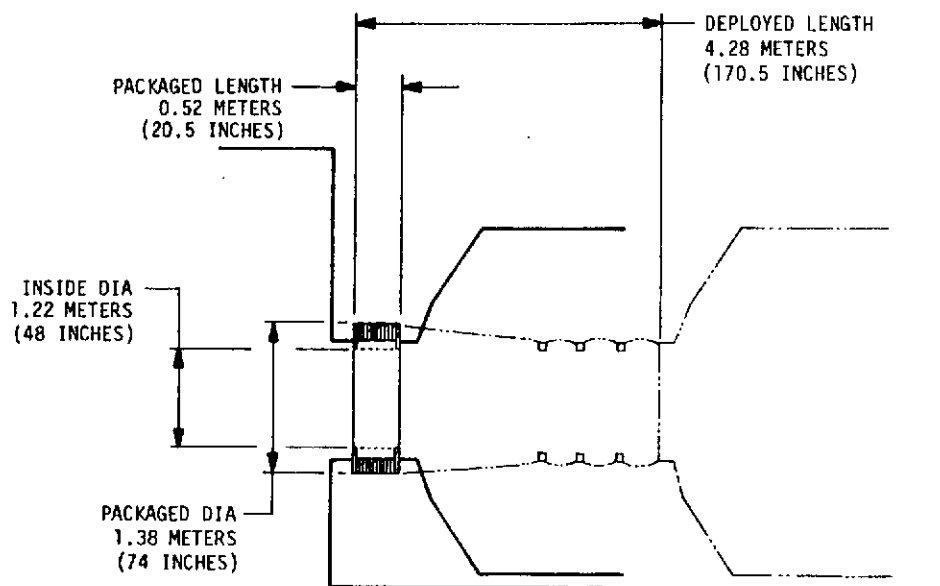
SORTIE LAB FLEXIBLE TUNNEL ENVELOPE DIMENSIONS
